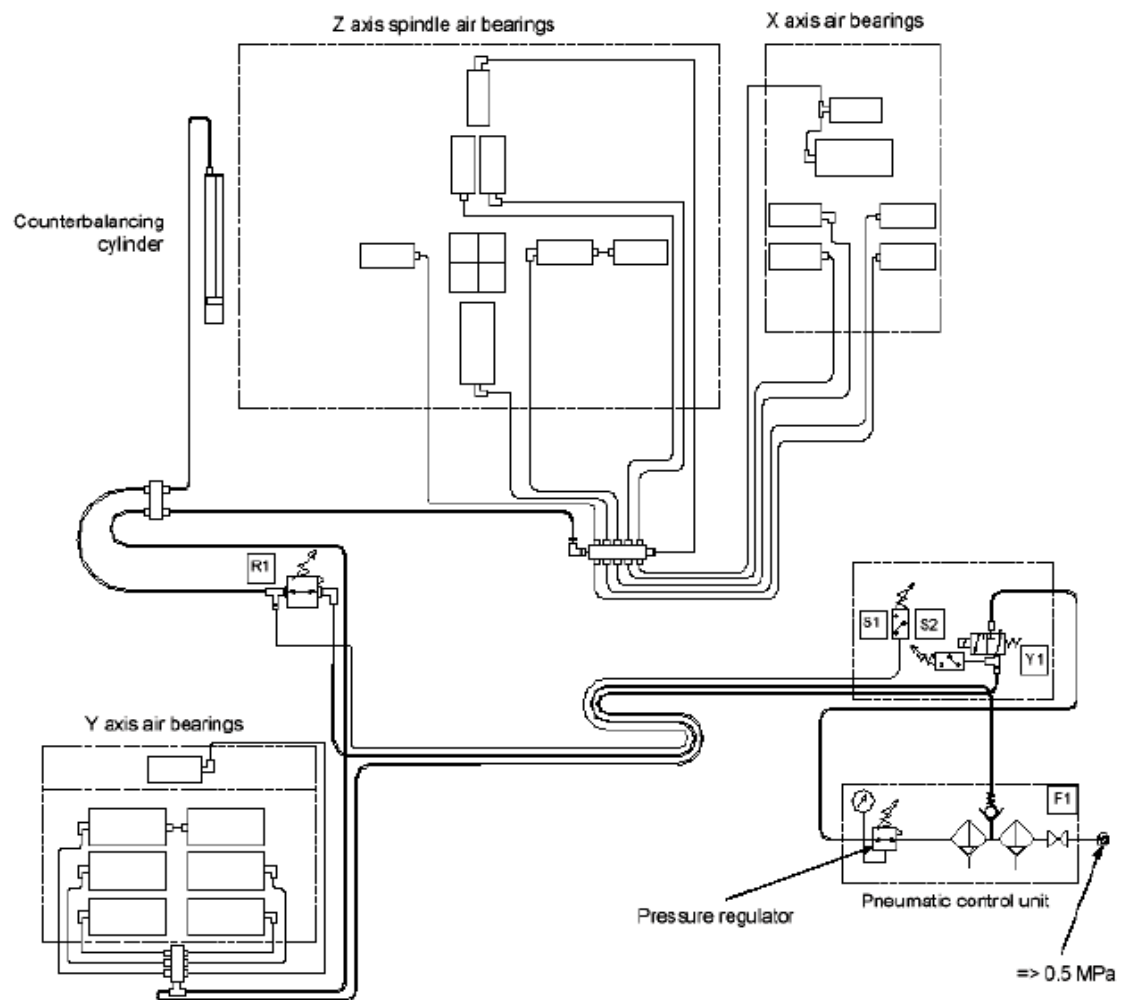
Air Circuit Drawing (only for 06.xx.06 & 08.xx.06 Models)
